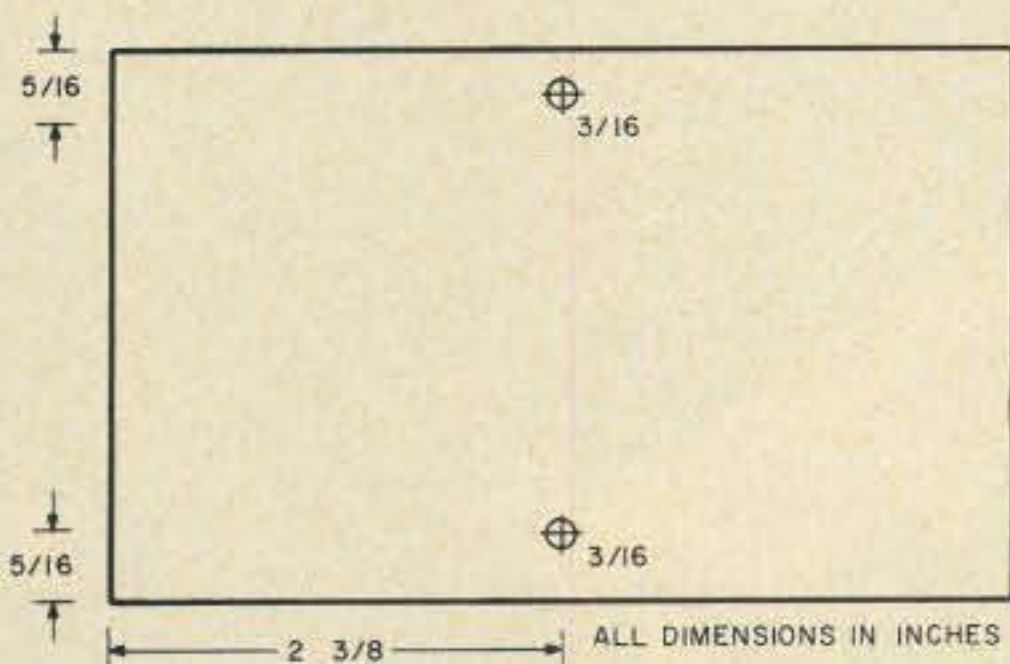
Heat sink drill guide. Heat sink is International Rectifier HE330-C or Wakefield 623-K.
